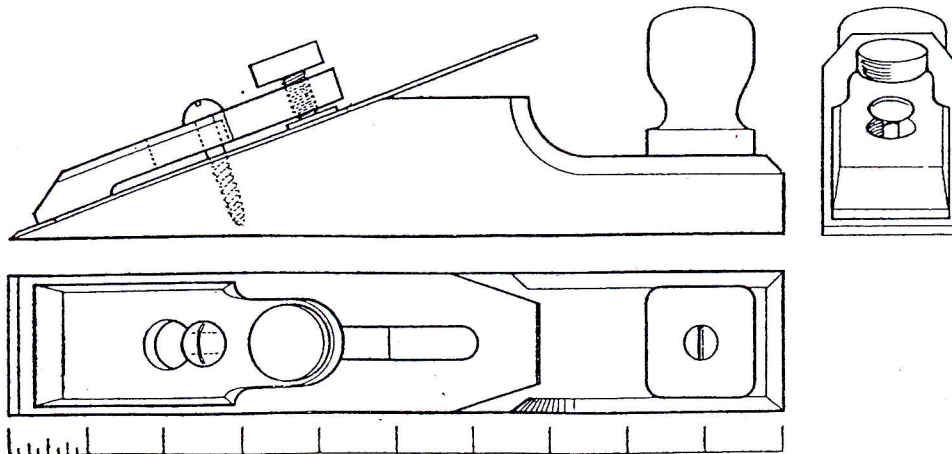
SIDE AND FRONT ELEVATIONS AND PLAN. SIZES CAN BE TAKEN FROM SCALE.
